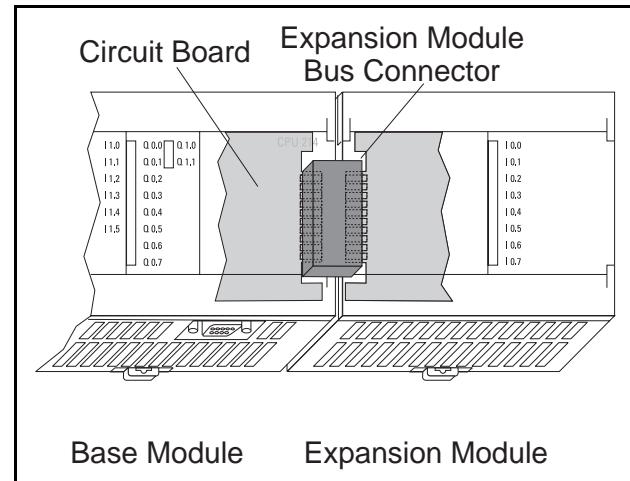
Proper Expansion Module Placement (Cutaway View)
